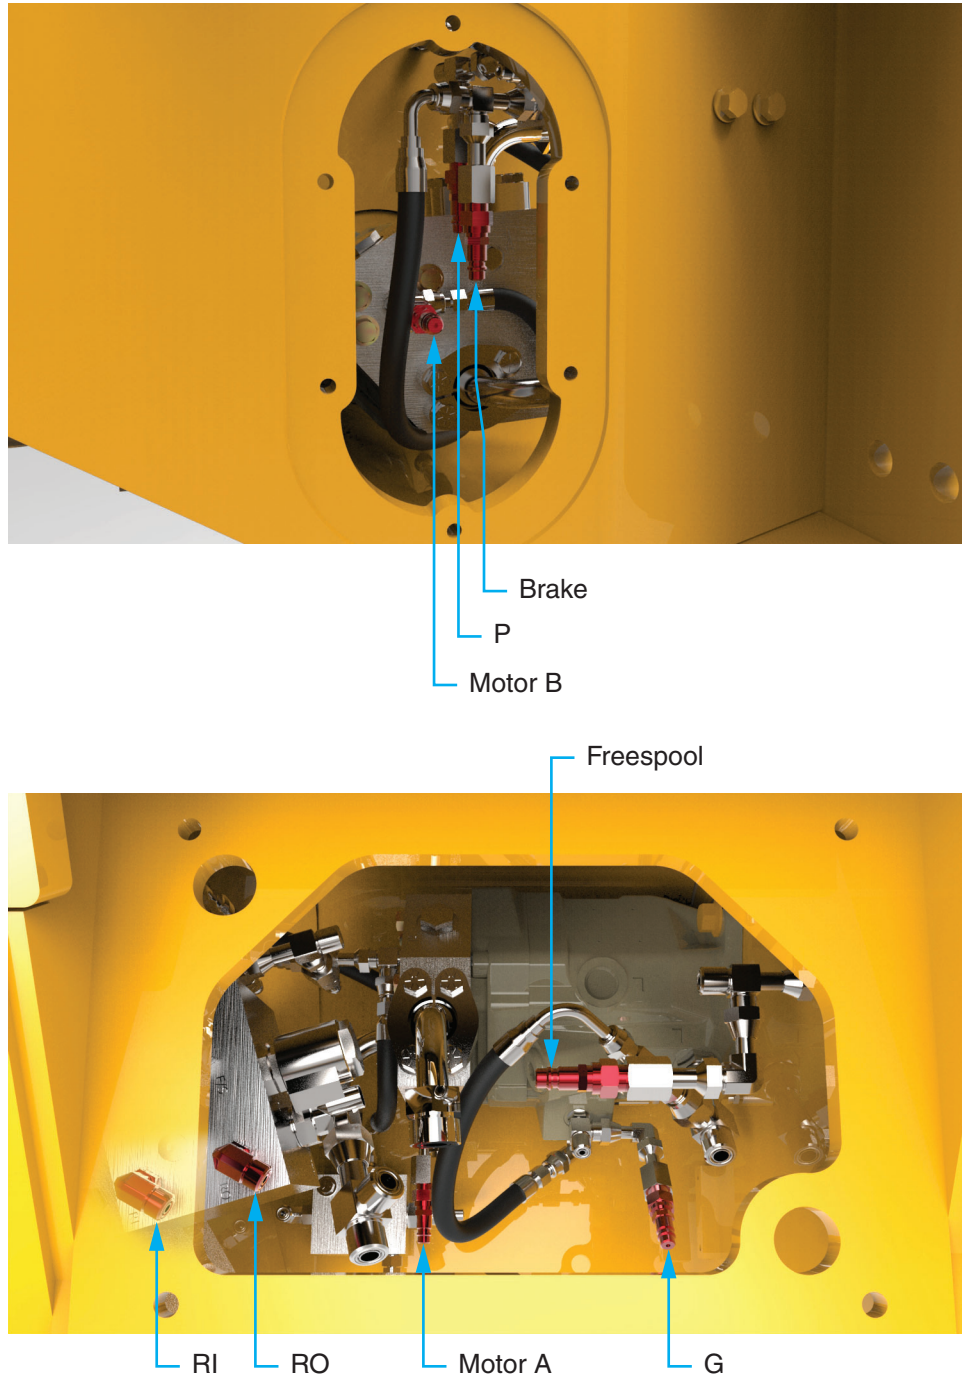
Hydraulic Test Ports, Non-SCH Standard Winch
